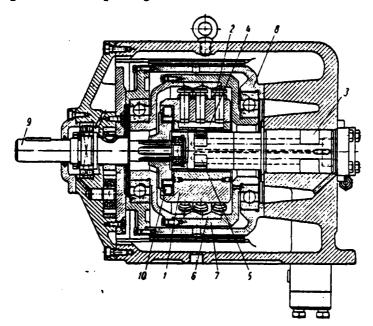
The construction/design of a rotational-plunger pump with the freely moving plungers: 1 - rotor; 2 - plunger; 3 - distributive axis/axle; 4 - valve ports; 5 - plenum channels; 6 - conical carrier rings; 7 - rotating drum; 8 - unit of pump; 9 - drive shaft; 10 -
